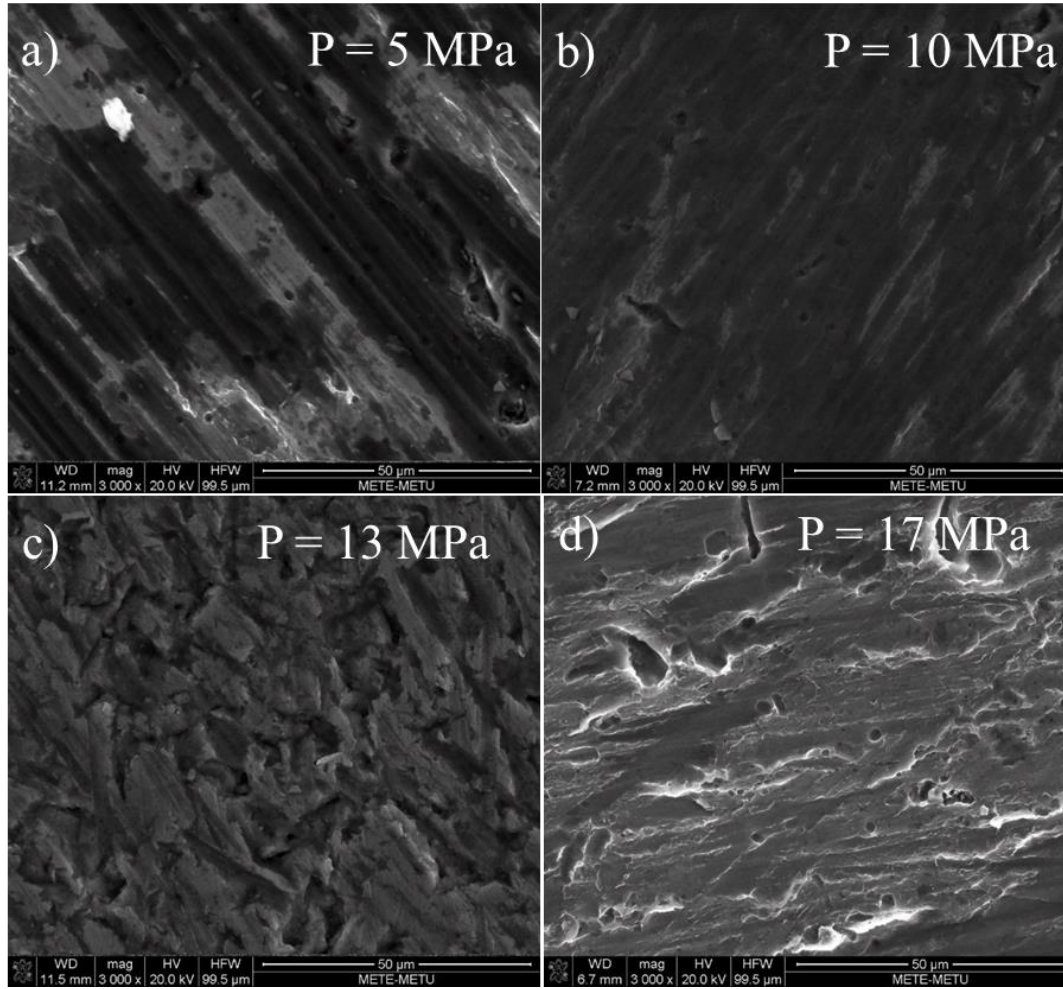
2. Fracture surfaces of the specimens diffusion bonded under a) 5 MPa, b) 10 MPa, c) 13 MPa and d) 17 MPa at 450°C for 3 h. and cooled in furnace.
